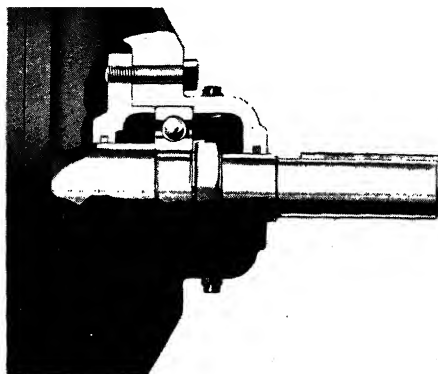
Ball bearing for electric motors. (*Courtesy of Louis Allis Company.*)
